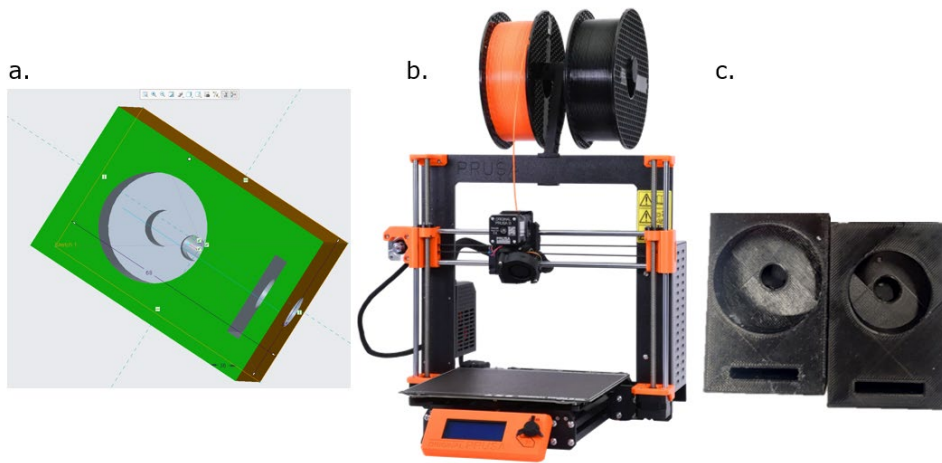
3D part designed in Creo and printed using Prusa i3 MKS3+ printer. (a) Parts drawn using Creo (b) Prusa i3 MKS3+ printer (c) 3D printed parts.
